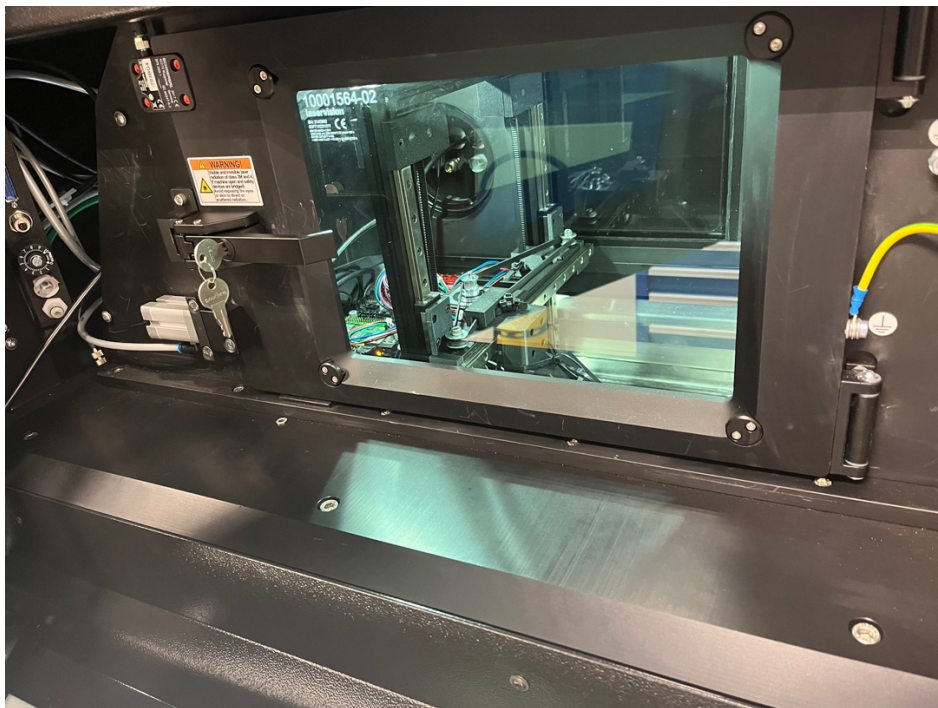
Final airflow measurement device fully assembled in the build chamber (sealed view)
